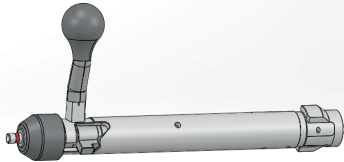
Firing pin assembly is placed into position as shown into bolt.
